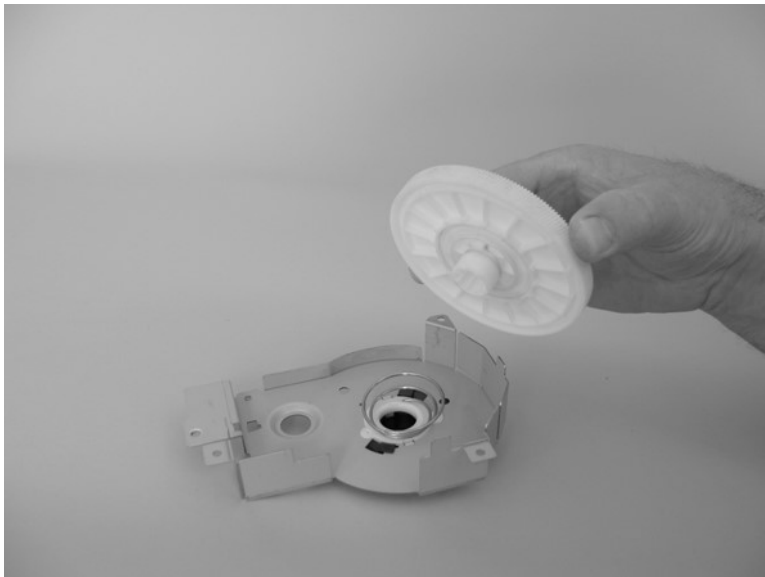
Remove the drum-drive assembly (4 of 4)
